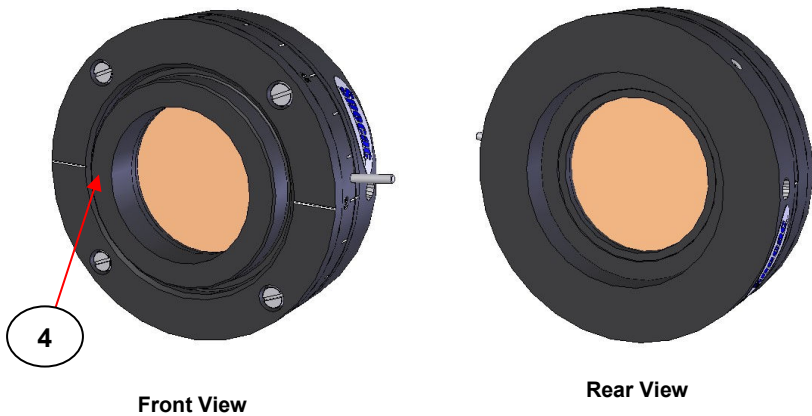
Front and Rear Views of Rotator Mount P/N GS12510 with Protective Covers Removed (Polarizer Fitted)
